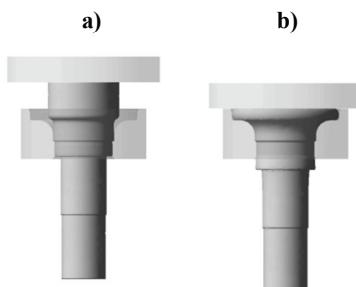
Single blow upsetting of the flange, where: a) initial, b) final position and shape of the forged shaft.
